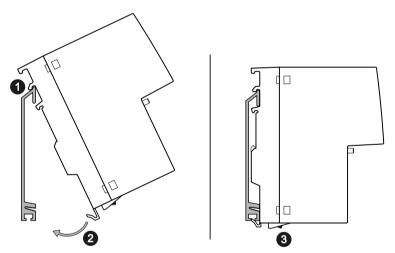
S7-300 mounting rail installation with the securing bar in the wall mounting position.
